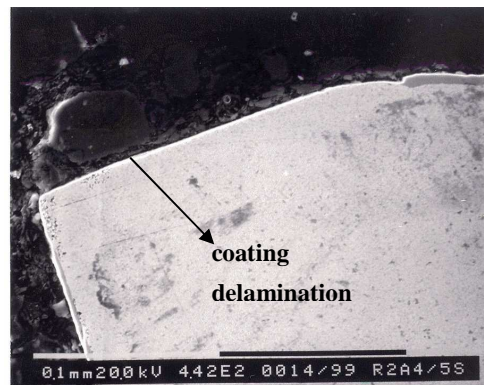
Section of Tool A showing delamination of coating on the chamfered face after 5 seconds of face milling at 80 m/min.
